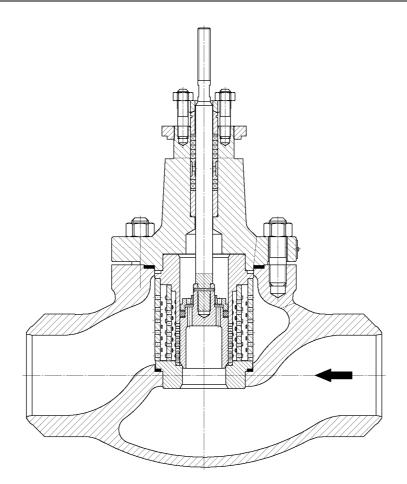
Z1B type control valve with a balanced valve plug with a gasket
